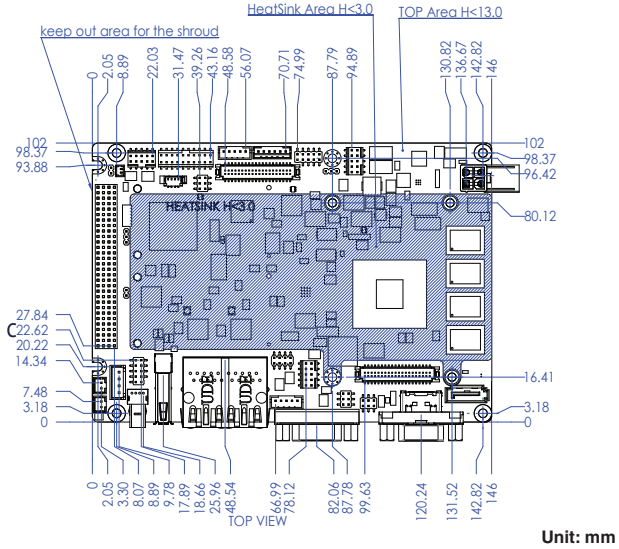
PCM-9365 Mechanical Drawing (Top Side)
